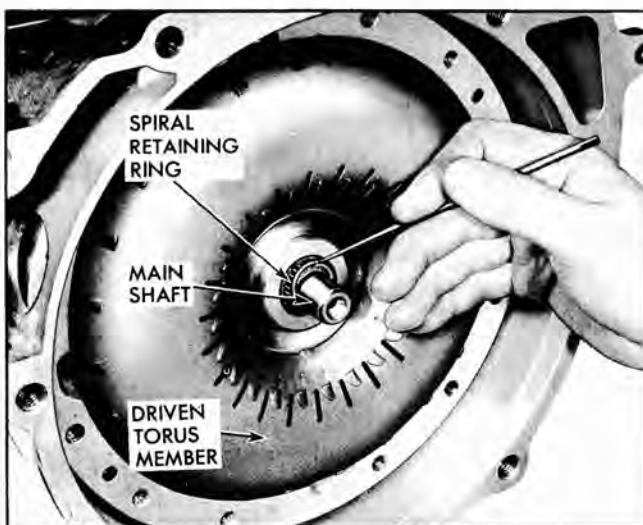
Installing Spiral Retaining Ring on Main Shaft
